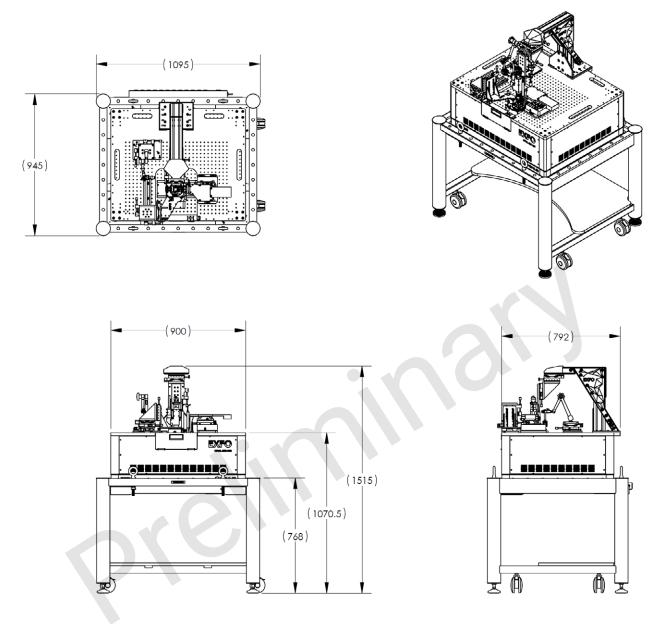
Technical drawing of the OPAL-MD-100 main system with dimensions in millimeters. Shown here with one (1x) PRO-P40 optical head and one (1x) PRE-00 manual electrical head. Not shown are the included industrial rackmount PC, and the IT Kit (monitors, keyboard, mouse). Not shown are the chiller and the thermal chuck controller included with the (-TCH option). Non-final.
